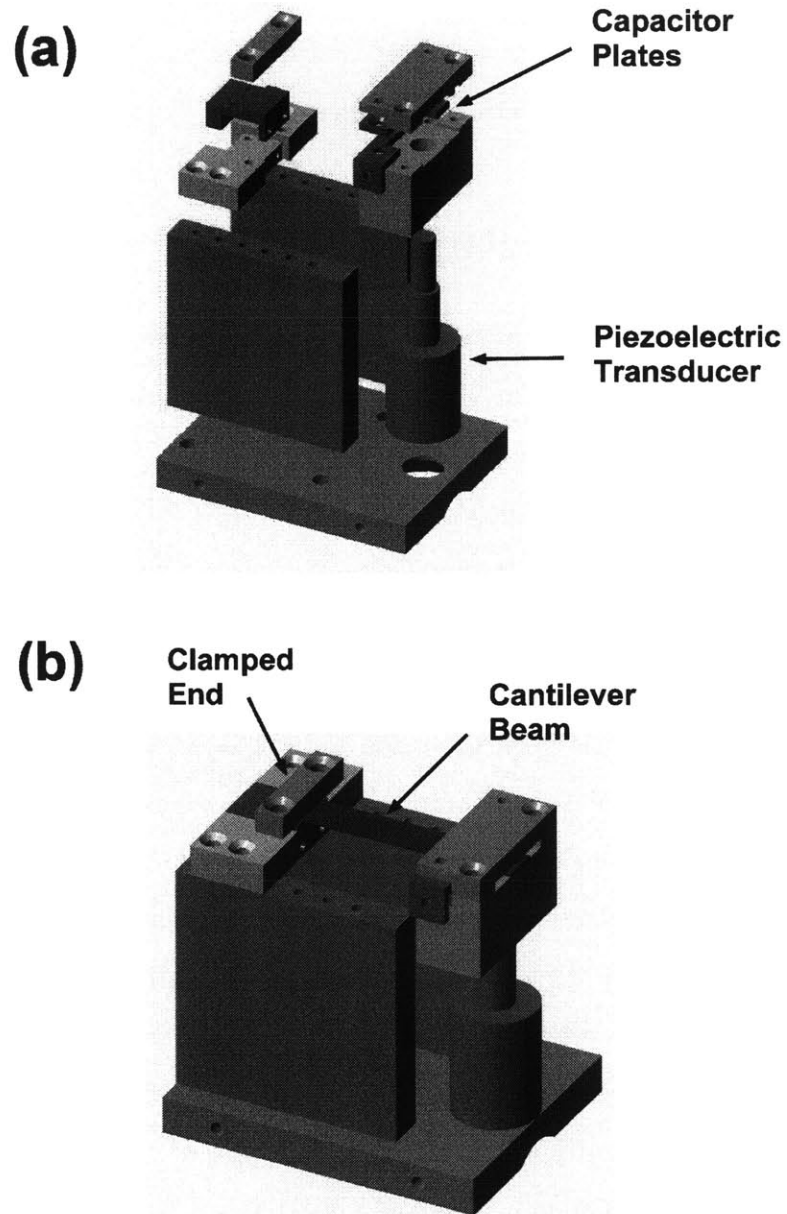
Component drawing of the cantilever beam magnetostrictor. a) before the components are assembled; b) after the components are assembled. A cap (made out of aluminum; not drawn) is used to seal the system from the surrounding electronic noise and to keep the temperature of the system stable within the measurement time (The figures are drawn by Andrew Gallant from the MIT Central Machine Shop).
